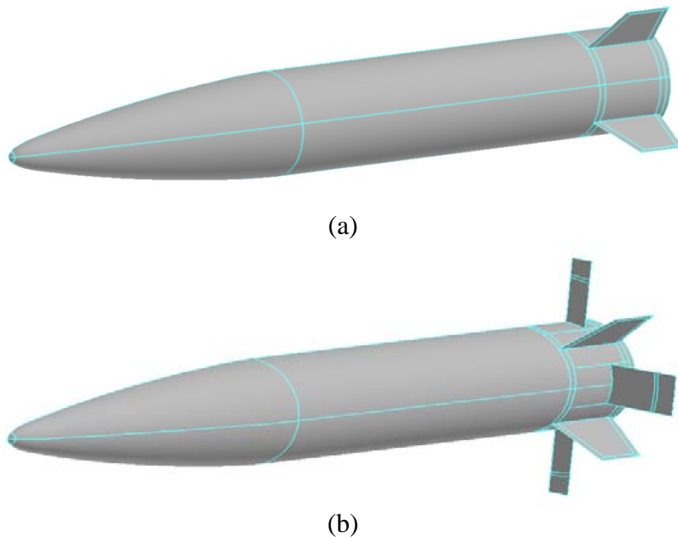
Geometry of body a) retracted position of drag surfaces b) deployed position of drag surfaces.
